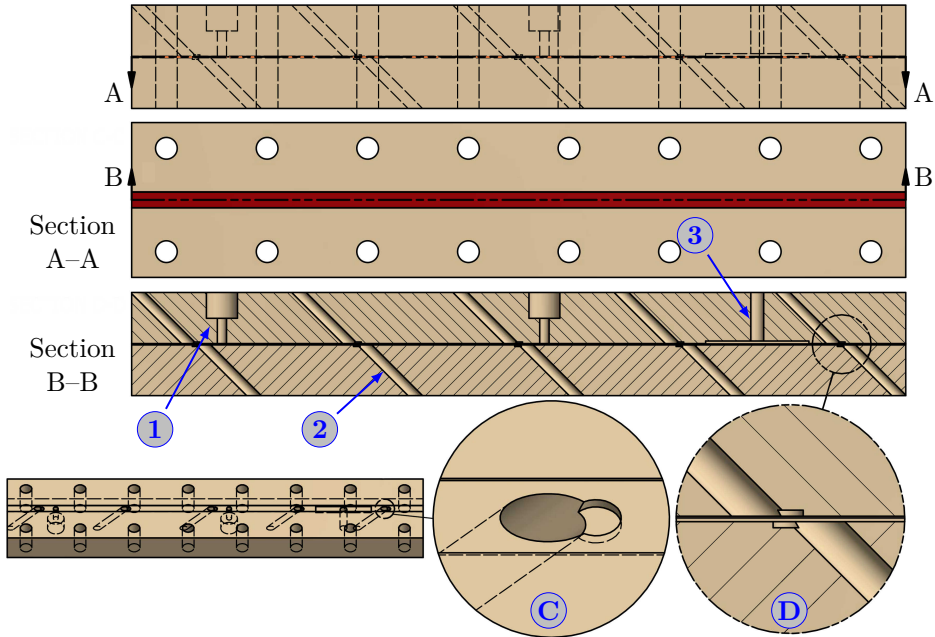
Drawing of top and bottom PEEK plate assembly, with heater strip. (1): pressure probe holes, (2): temperature sensor lead holes, (3): capacitance measurement probe hole, and (4): bolt holes, . Bolt holes and temperature sensor lead holes have equivalent holes in both top and bottom plates.
